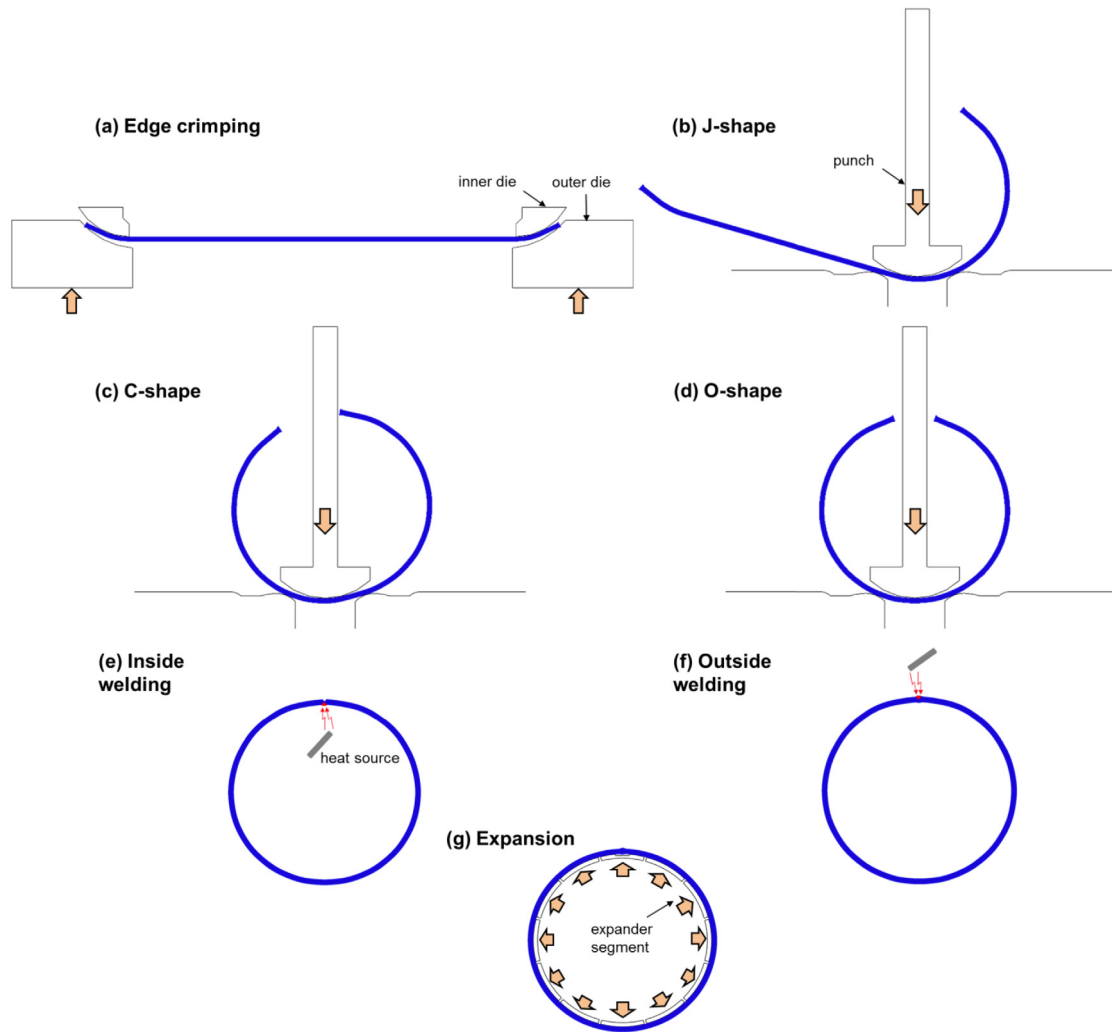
Schematic representation of the JCO-E manufacturing process; (a) crimping, (b) J-phase, (c) C-phase, (d) O-phase, (e) inside welding, (f) outside welding, (g) Expansion.
